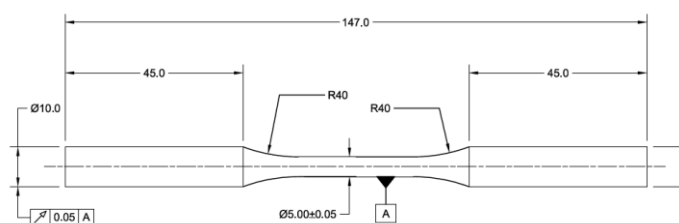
Specimen according to ASTM E466 (Dimensions in millimeters).
